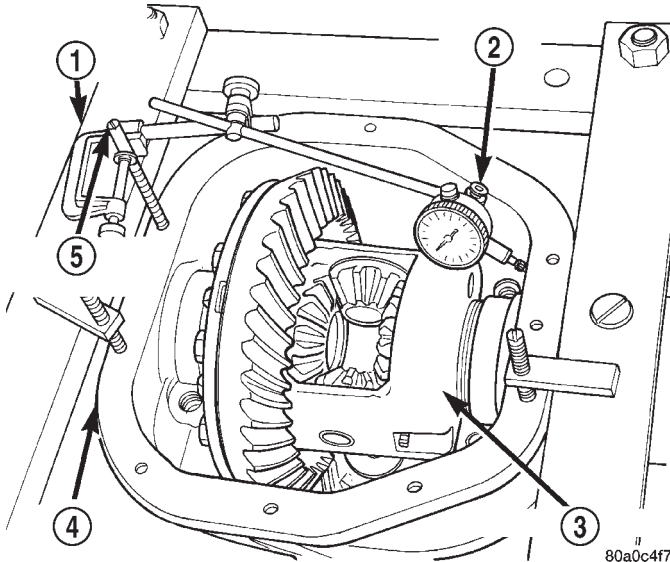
SPREAD DIFFERENTIAL HOUSING
